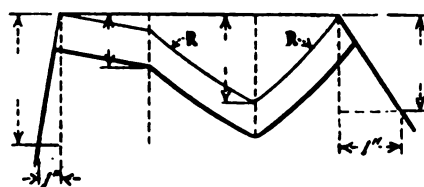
Form of winding mold for coils with both sides above the throw line.
